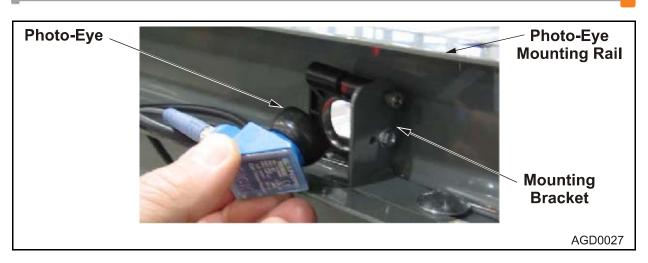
8 Retro-reflective Photo-Eye (Ball Mount)
